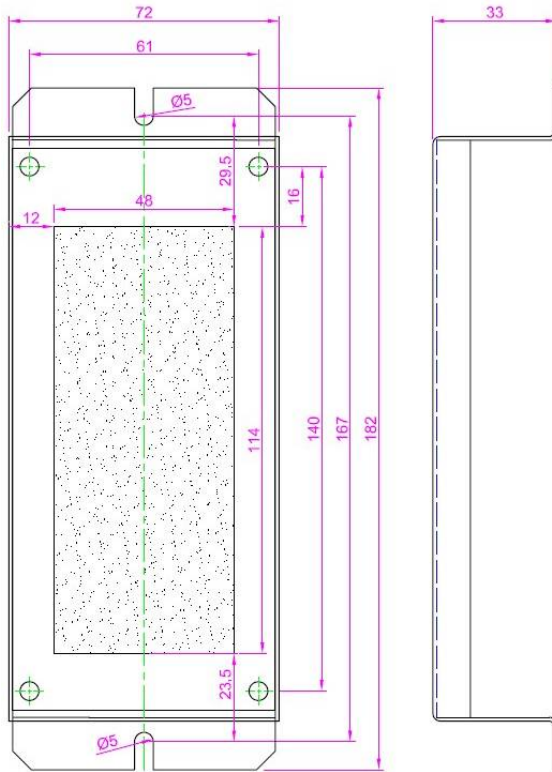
Mounting Dimensions of SM-04-VL16/A
